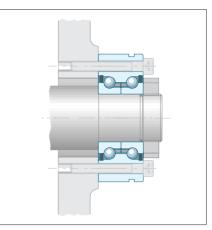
Series ZKLF thrust angular-contact ball bearing bolted to a flat-milled surface
